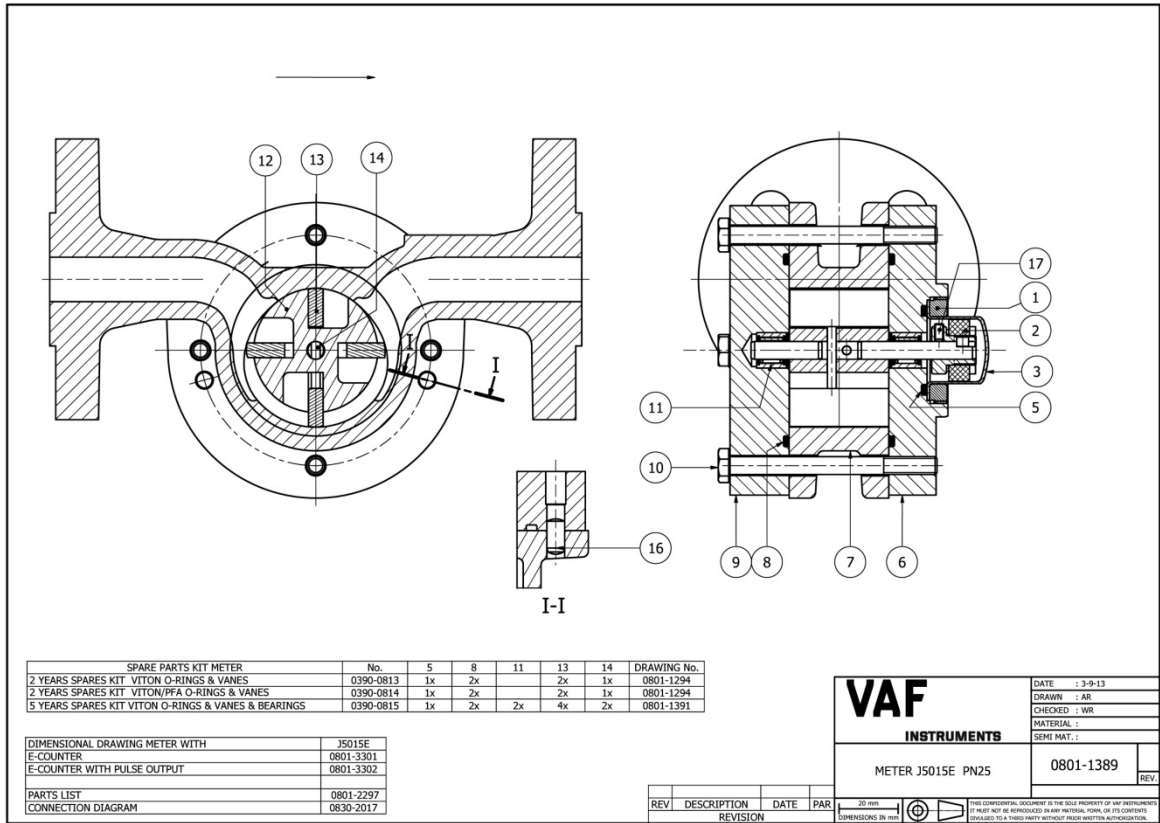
Drawing 0801-1389 – Meter J5015E PN25
